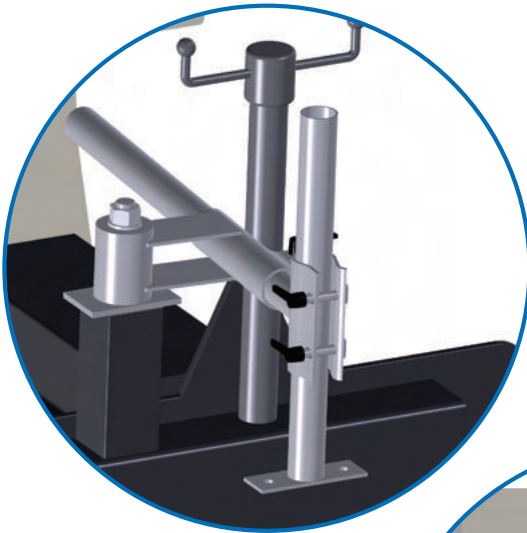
Example of a positioning of the mounting tube on the outer side the side plate of the screed
